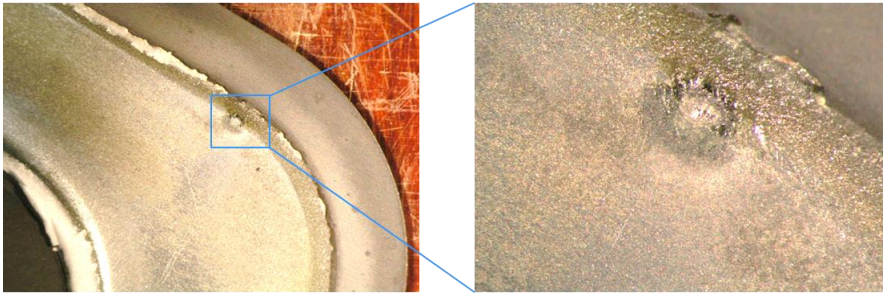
Stack: CS^V05-04, bottom side of cover plate: location of short circuit between the bottom side of the cover plate and the cathode side of the cassette
